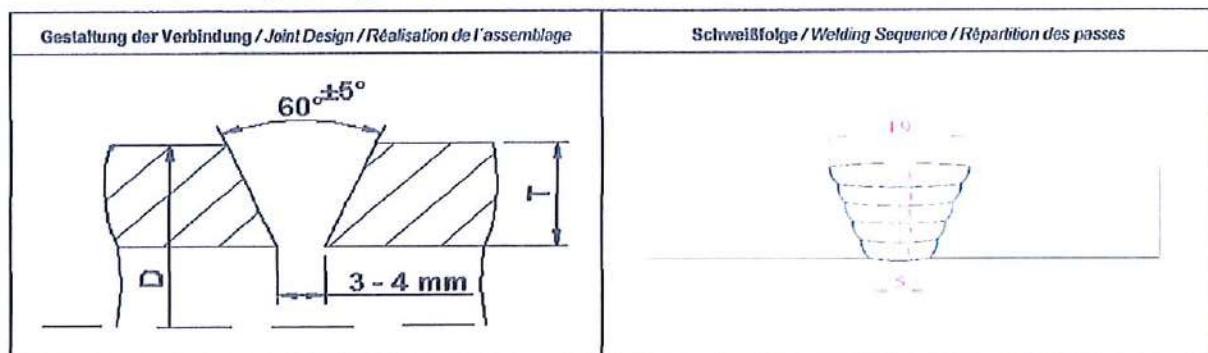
DETAILS OF WELD TEST (1) / DEFINITION DU TEMOIN SOUDÉ (1)
